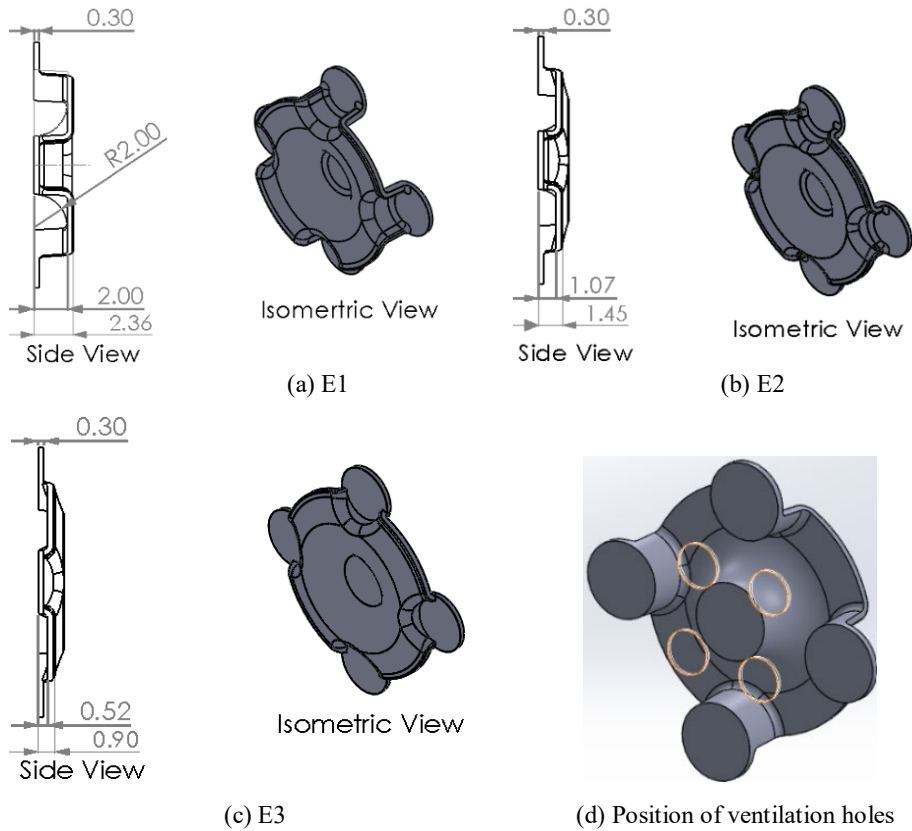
Three different geometric dimensions of ventilation element.
